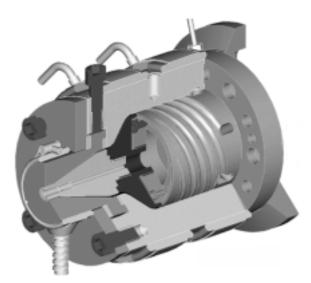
Inline spiral tube extrusion die. (Courtesy of StreamLine Extrusion)
